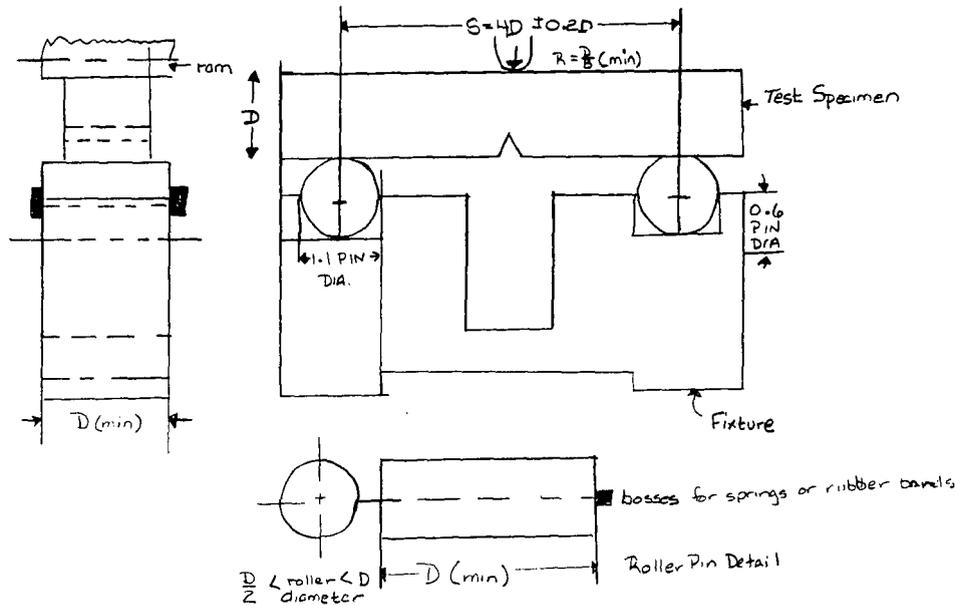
Fatigue Precracking Fixture Design
